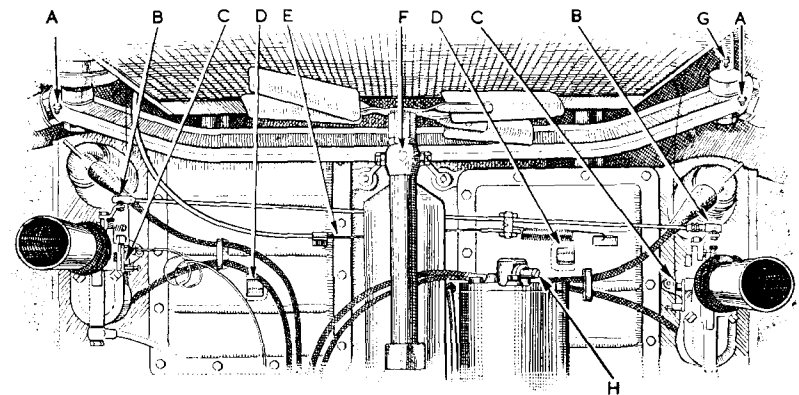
CARBURETTOR CONTROLS ON ENGINE (oil cooler not shown)
